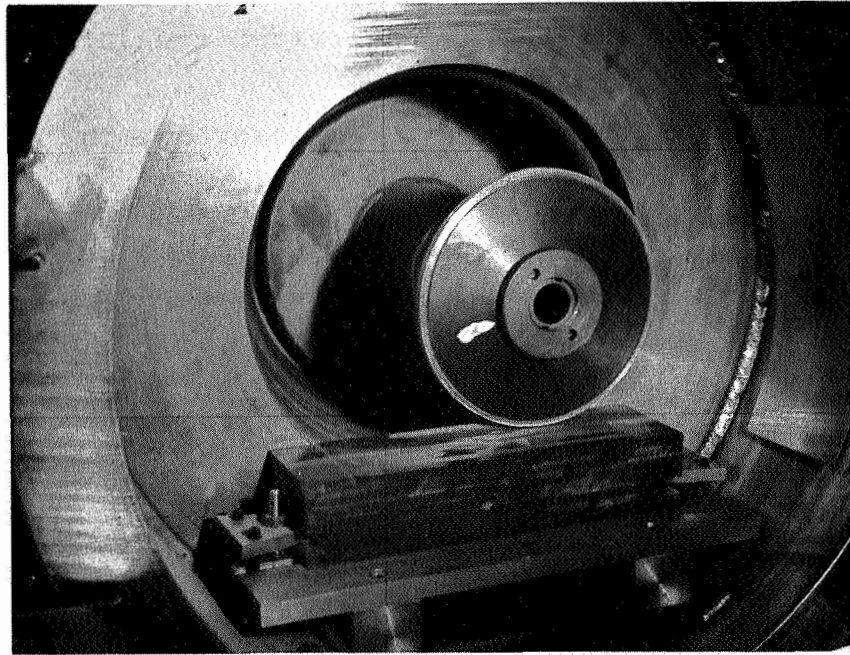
INSIDE VIEW OF THE VACUUM CHAMBER
